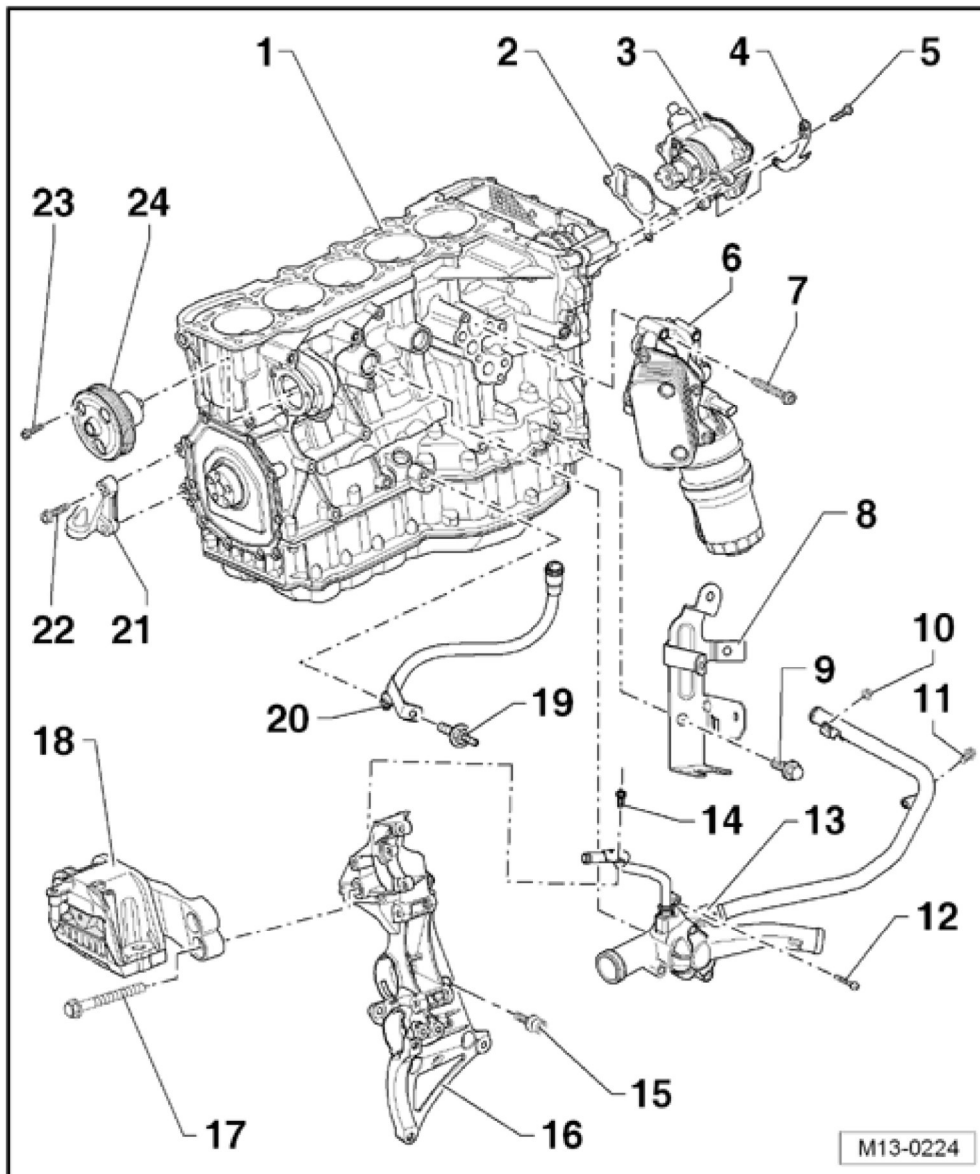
Attachments, Assembly Overview (Part II - Engine Front/Side)
